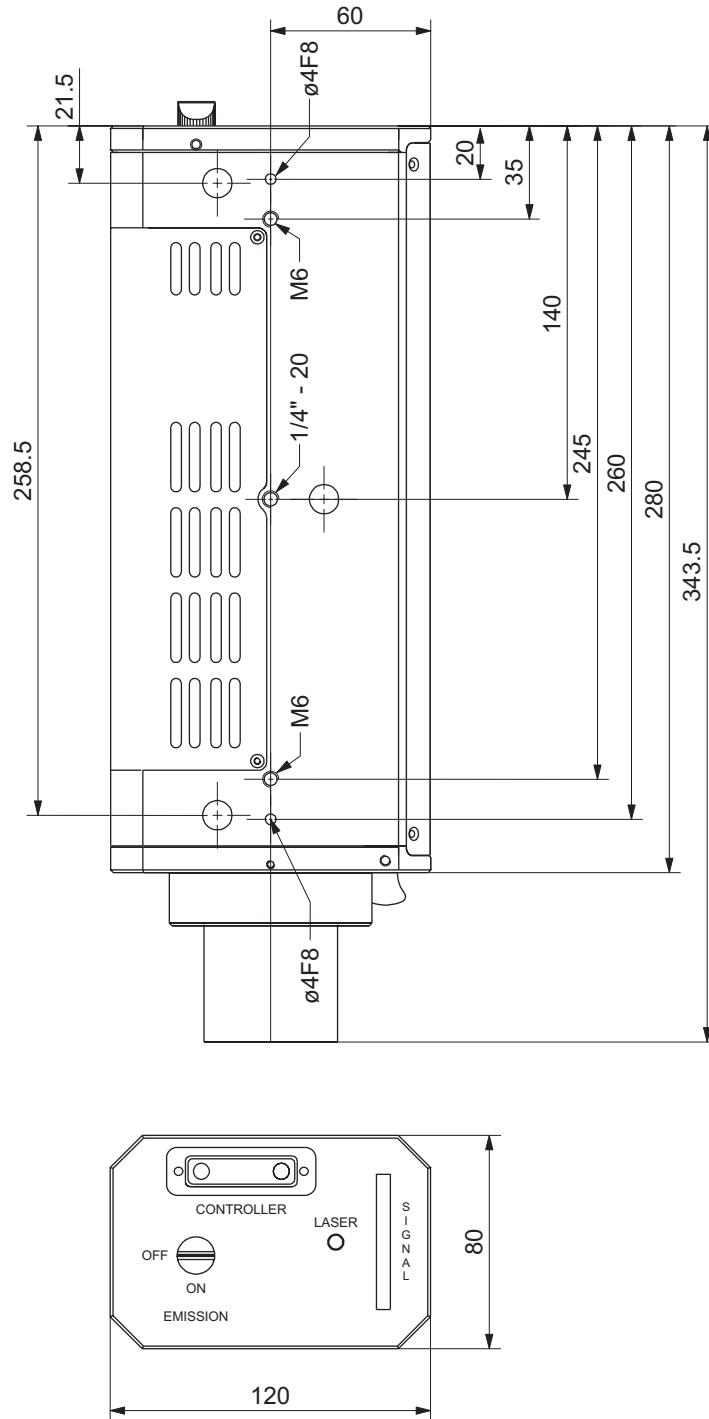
Rear view and bottom view of the sensor head OFV-303/-353 (dimensions not specified are given in mm)
